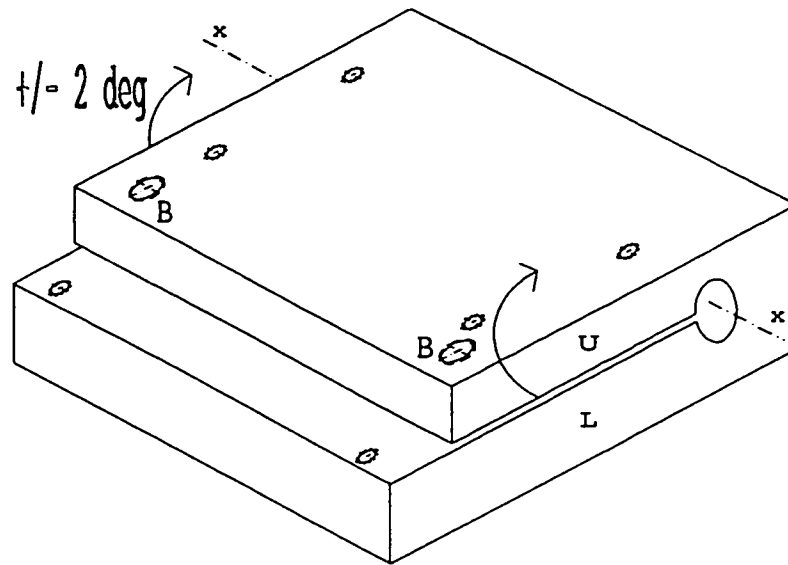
(b): Base plate. B's are precision adjusting screws. U and L are upper and lower plates.
